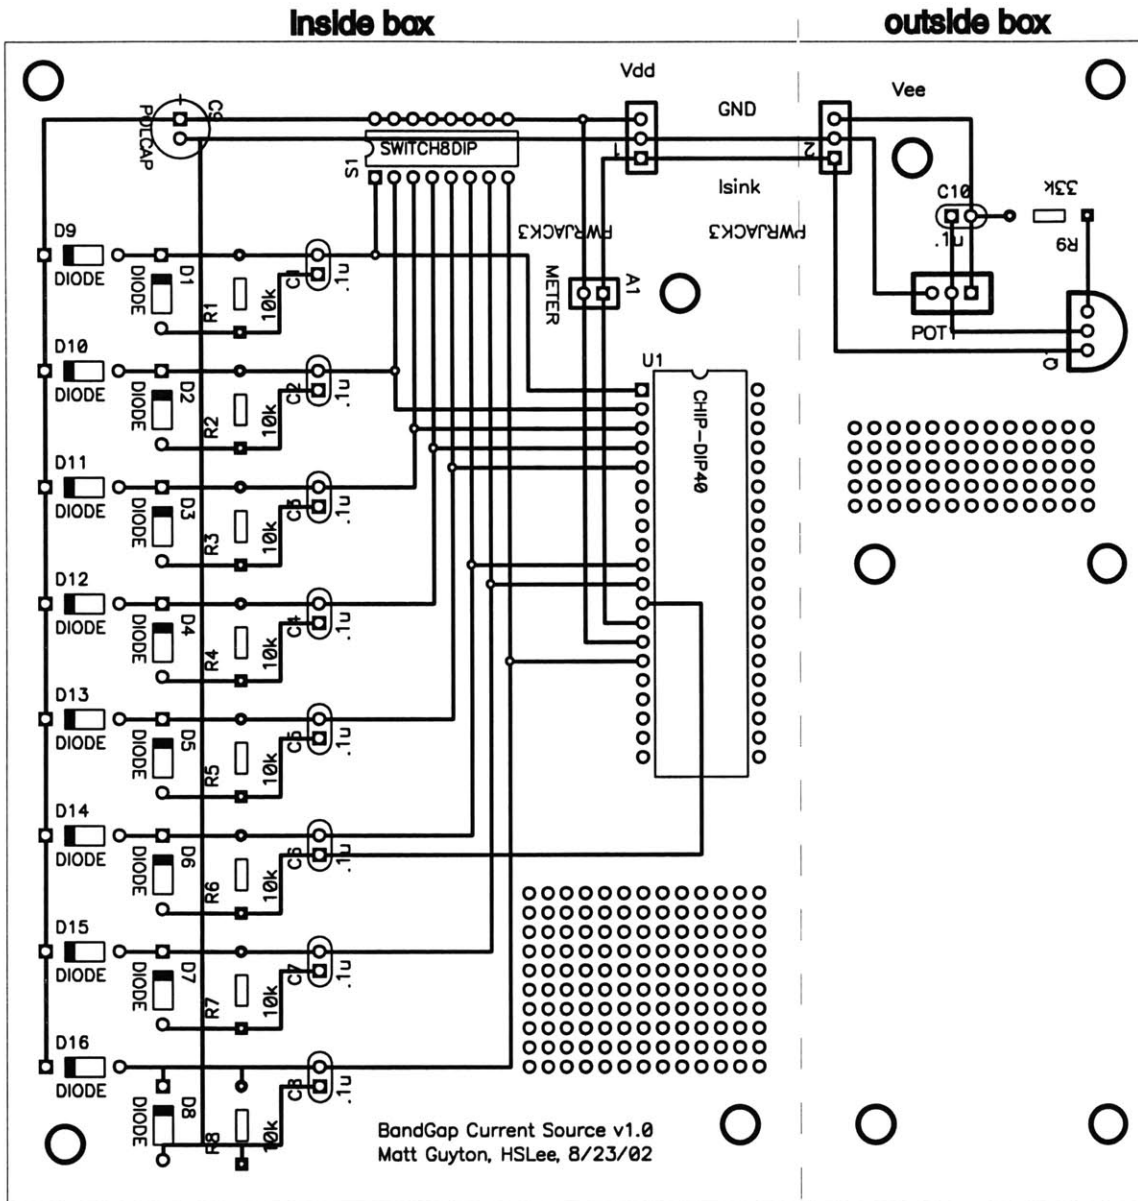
Test setup - printed circuit board layout. Board is split. Everything to right of DIP40 package placed outside temperature controlled environment.
